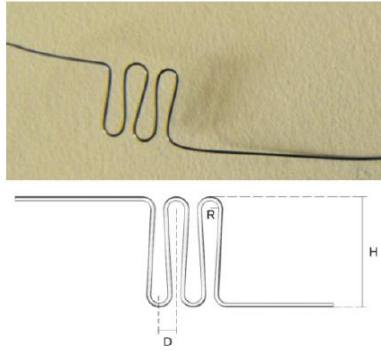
Snake-like shape in wire or laser-cut sheet [115](device #2)
